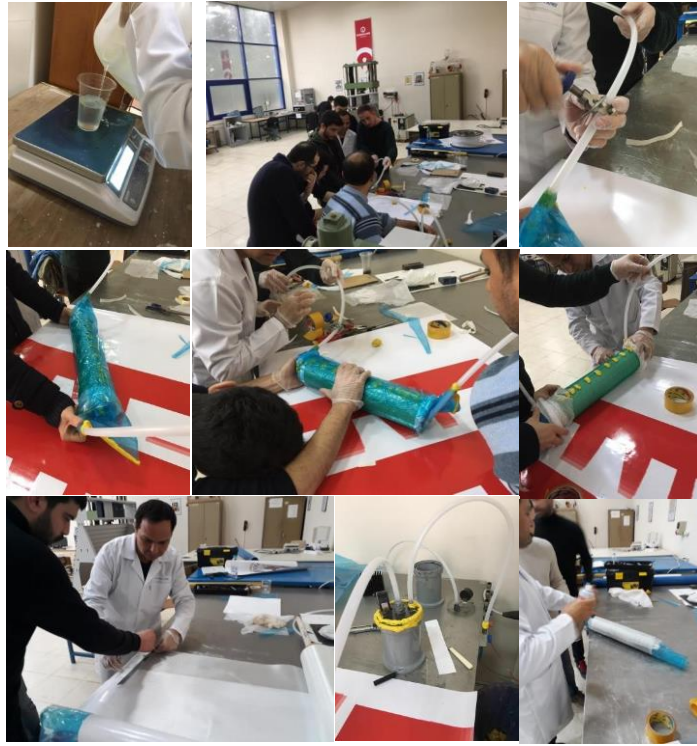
Manufacturing of Composite Body Pipe with Cylindrical Cross Section
